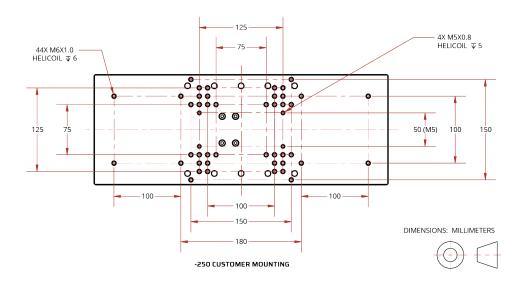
ATX165SL/SLE Mounting Plate Dimensions
